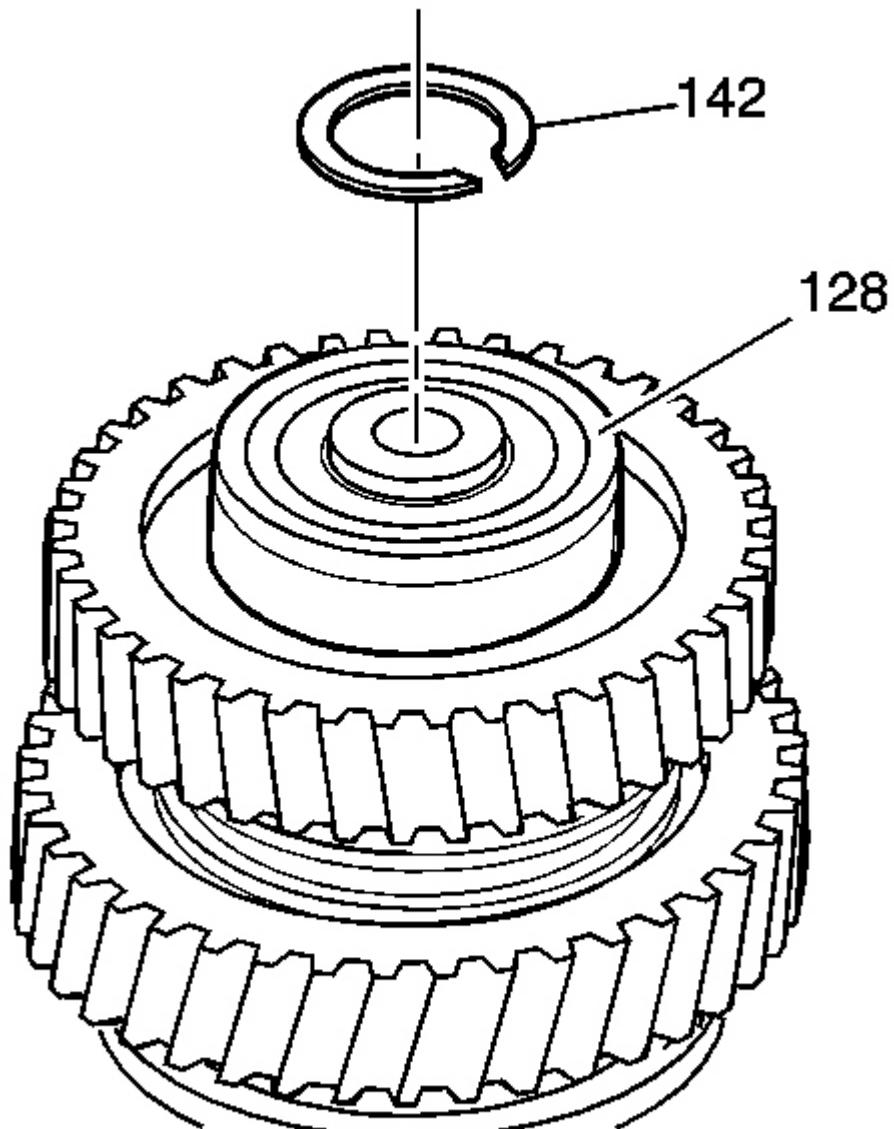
View Of Counter Gear Front Bearing & Snap Ring
